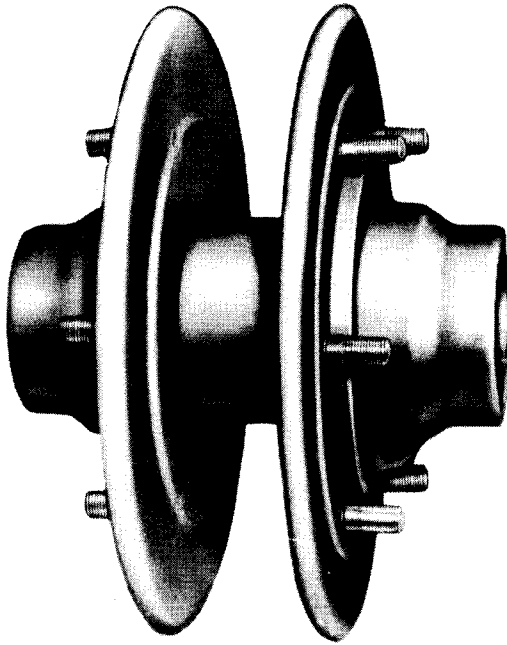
Bogie Roller with Bearing and Oil Seal Removed
